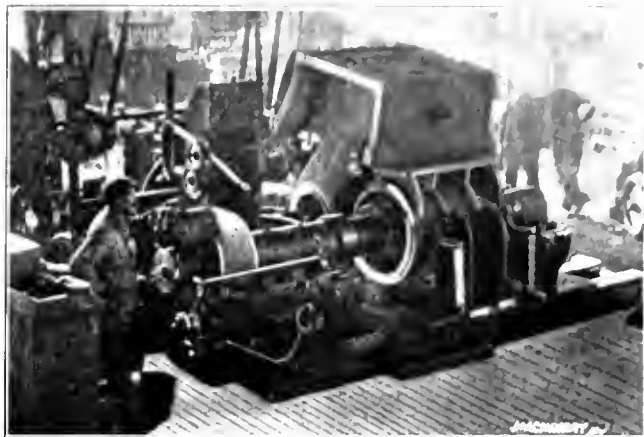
Machining both Bores of a Compound Cylinder simultaneously
